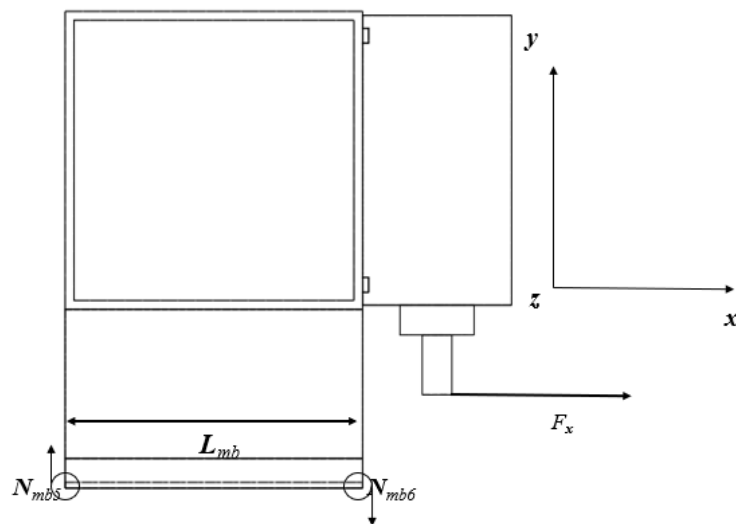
Side view of machine bed when +X directional machining force applied to tool.
